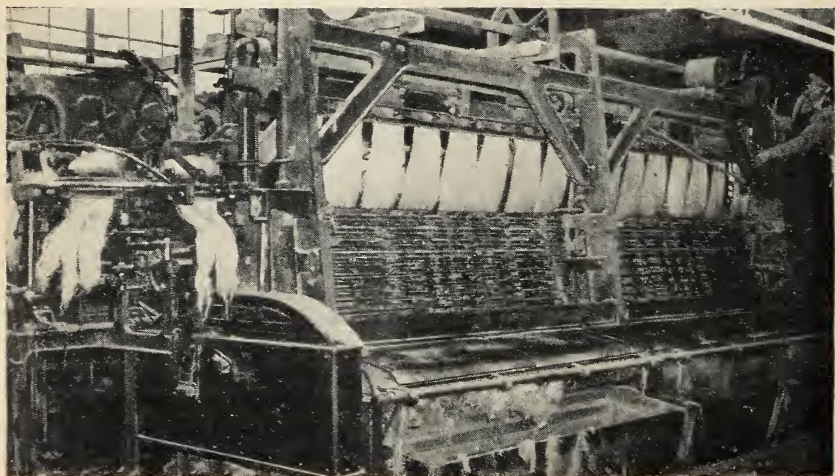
Machine hackling of line fiber. The hanks of fiber are automatically lowered to belts on which are mounted horizontal bars carrying pins for combing the flax. As the hanks are lowered, withdrawn, and moved forward, progressively closer spaced pins are encountered.
